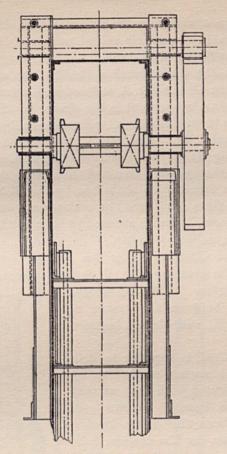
Driving End Detail. FEED ELEVATOR.
